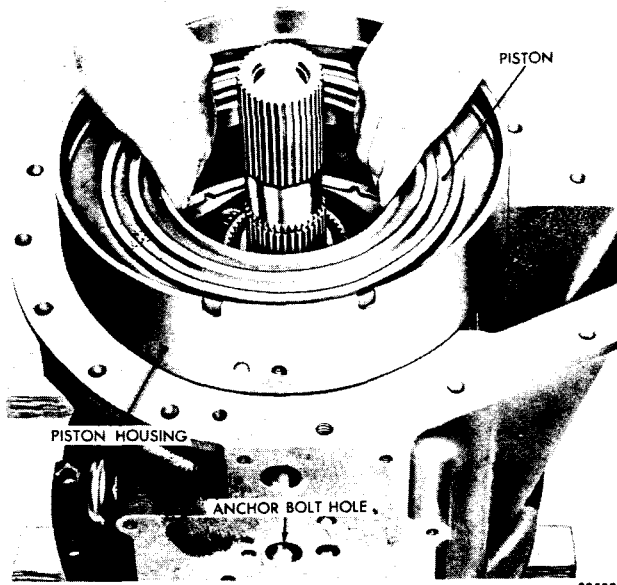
Installing (or removing) high-range clutch piston housing and piston
